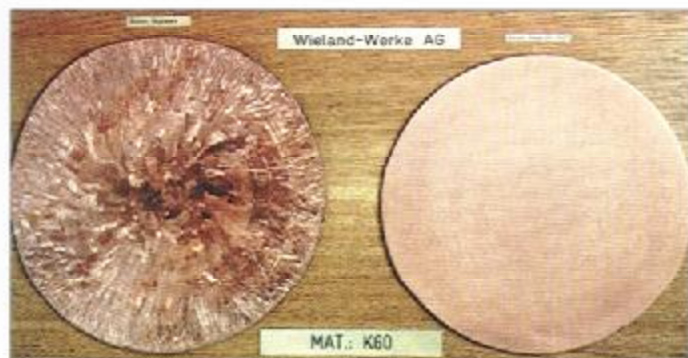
Macrostructure of continuously cast (left) and spray-formed (right) billet, \varnothing 250 mm, CuCrZr
